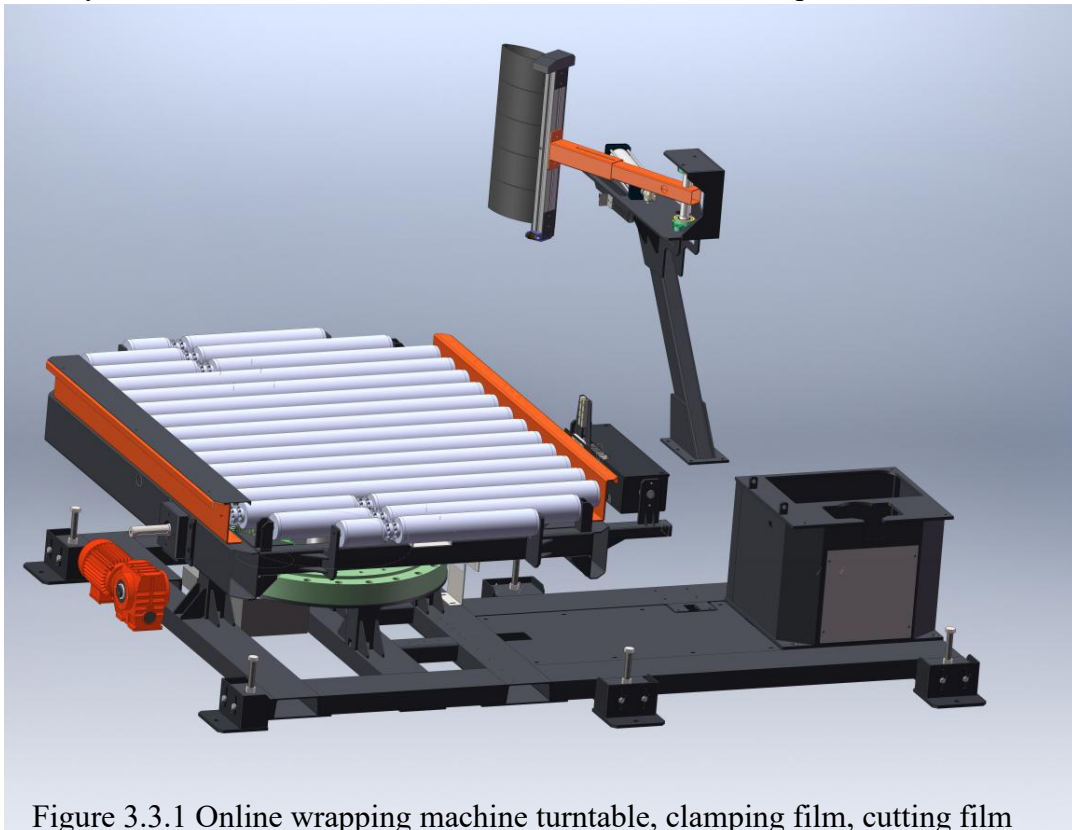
Online wrapping machine turntable, clamping film, cutting film
